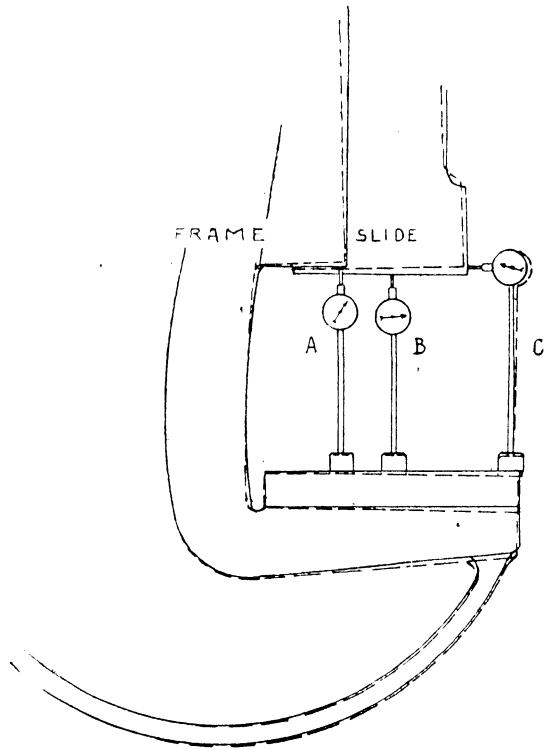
ELASTIC DEFLECTION OF THE PRESS PARTS (MUCH EXAGGERATED) AND THE POSITIONS OF THE INDICATORS IN TAKING THE READING.
